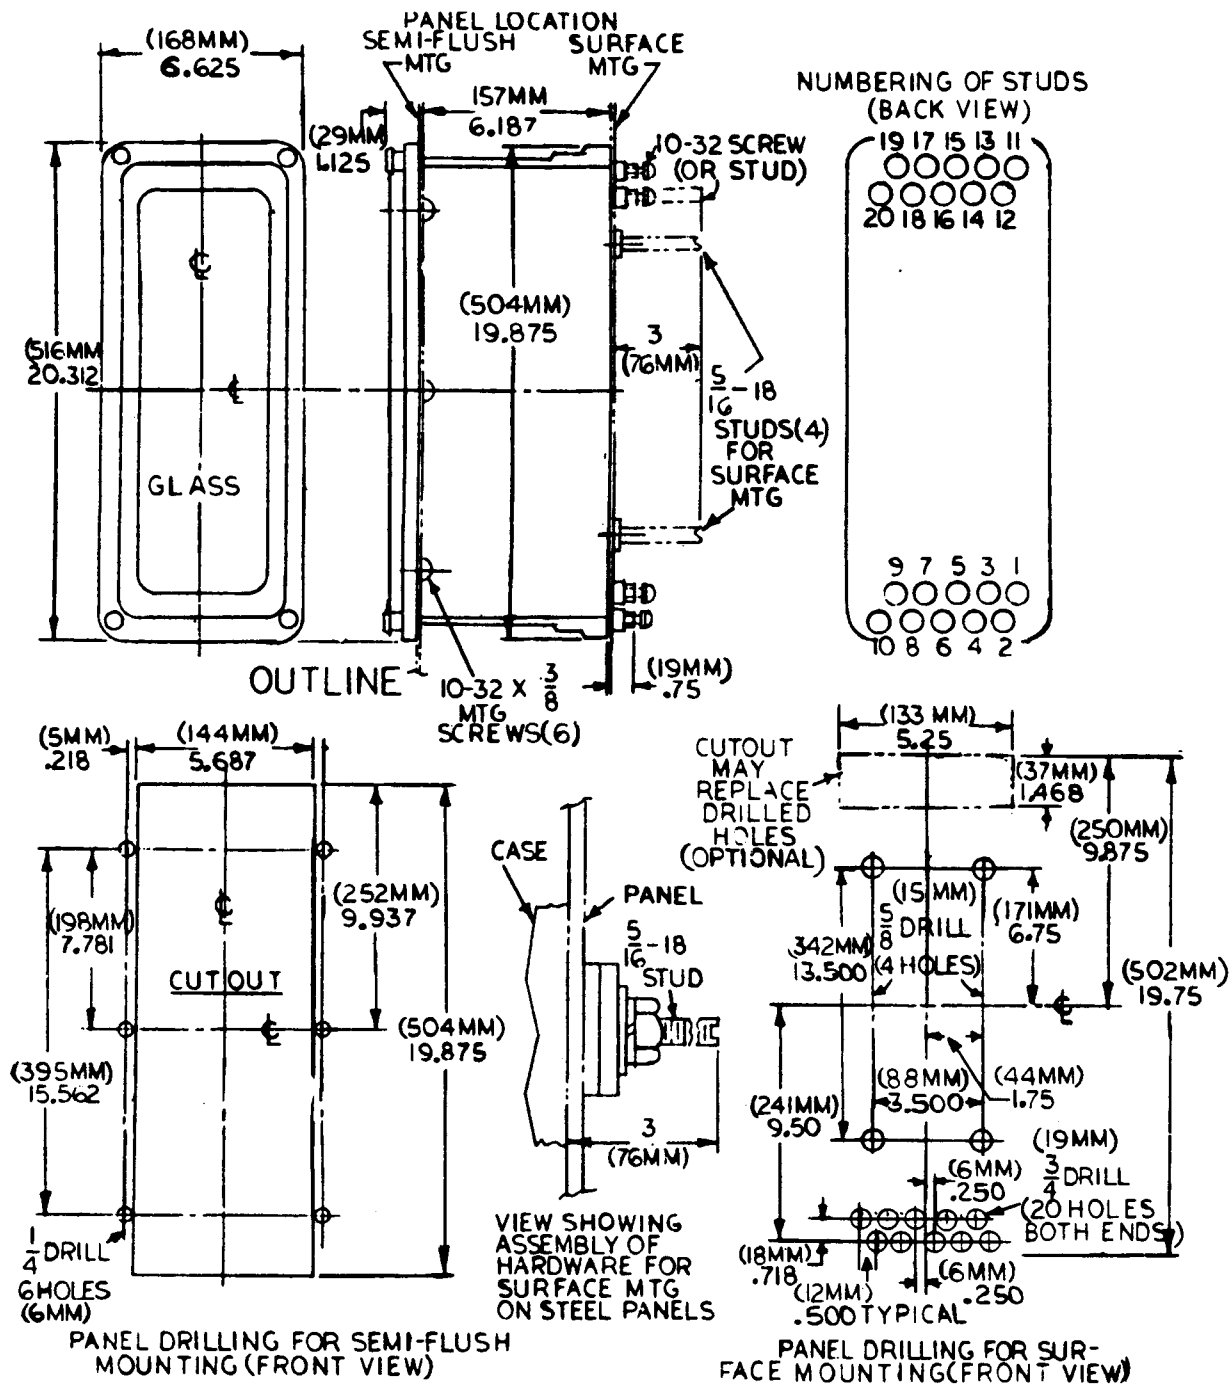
(6209276-3) OUTLINE AND PANEL DRILLING DIMENSIONS FOR RELAY TYPE BDD18B
